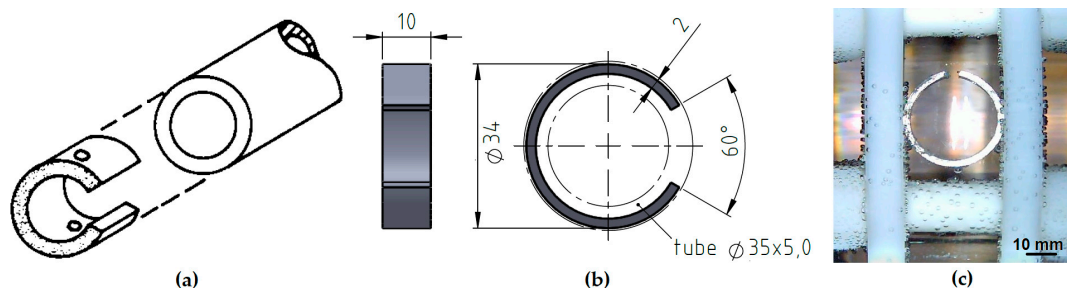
C-ring samples, position in the initial extruded tubes (a), sketch with dimensions (b) and during stress corrosion in the polyoxymethylene (POM) apparatus (c).
